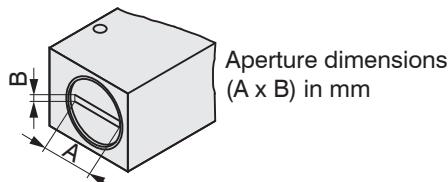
dimensional drawing ODC 1201, ranges 20/30 mm, dimensions in mm
